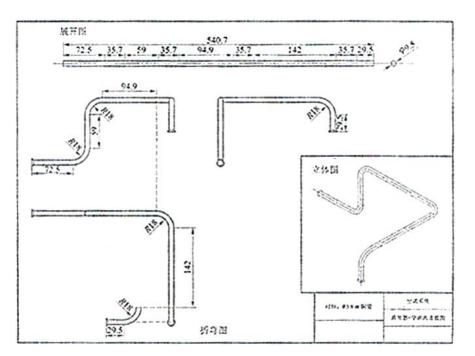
Dimensional drawing of air conditioner pipe 7
